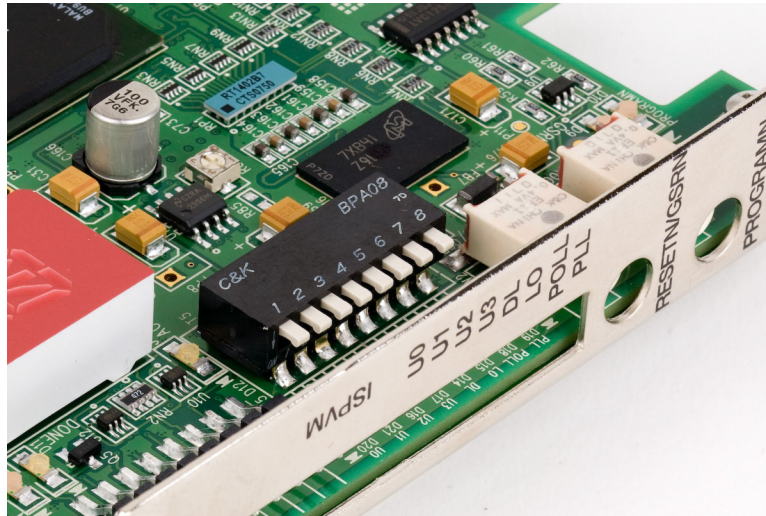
8-position DIP Switch (SW5) on Secondary PCB Side
